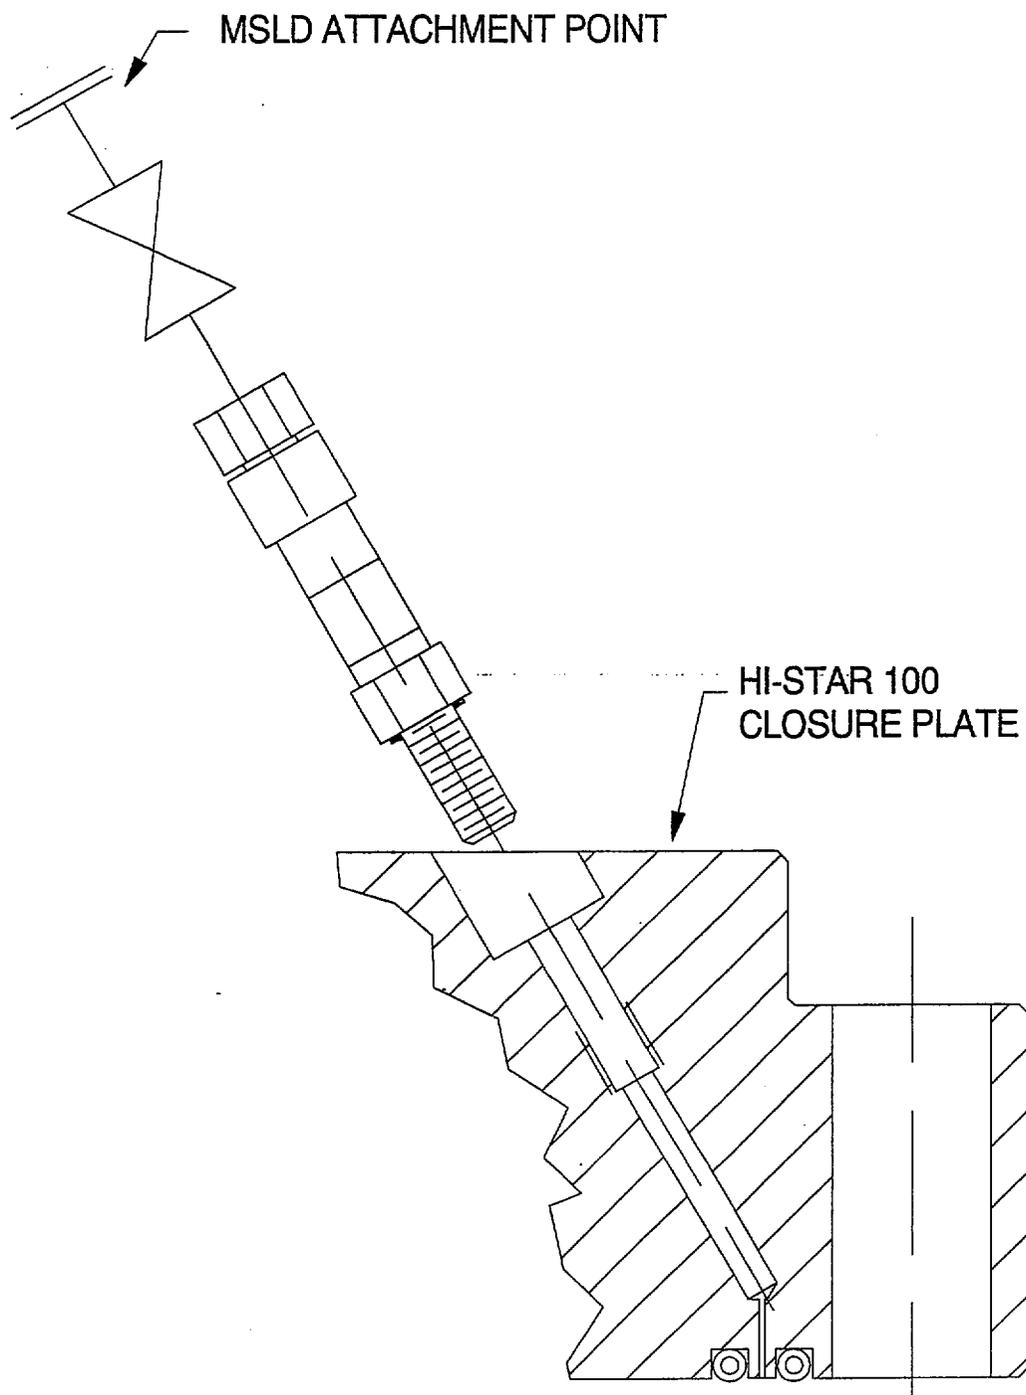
; HI-STAR 100 Closure Plate Test Tool
